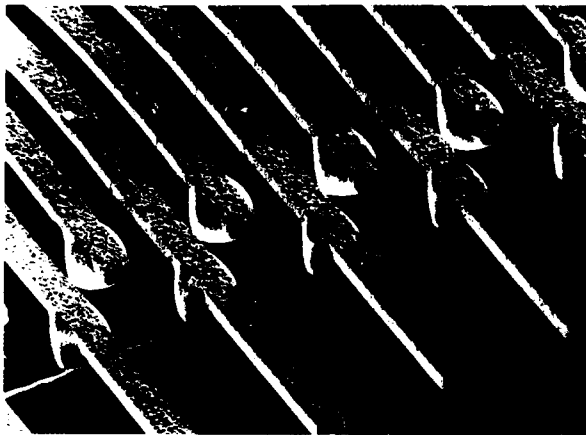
SEM photo of a section of a solder bump TAB assembly (Inner-Lead Bond).
